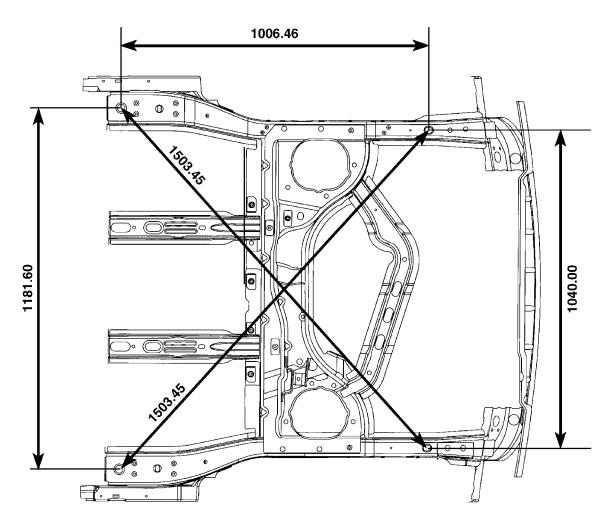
REAR FRAME SECTION SIDE AND BOTTOM VIEW
